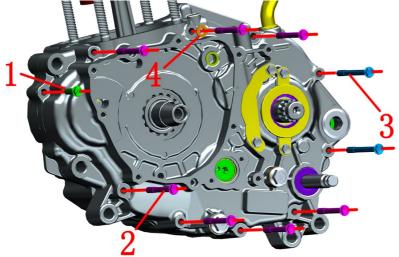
CRANKCASE		Crankcase disassembly-1	CHK	Q
